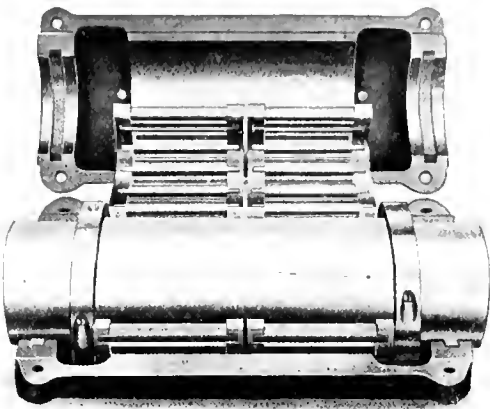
The Sells Roller Bearing, of the Double Cage Type
